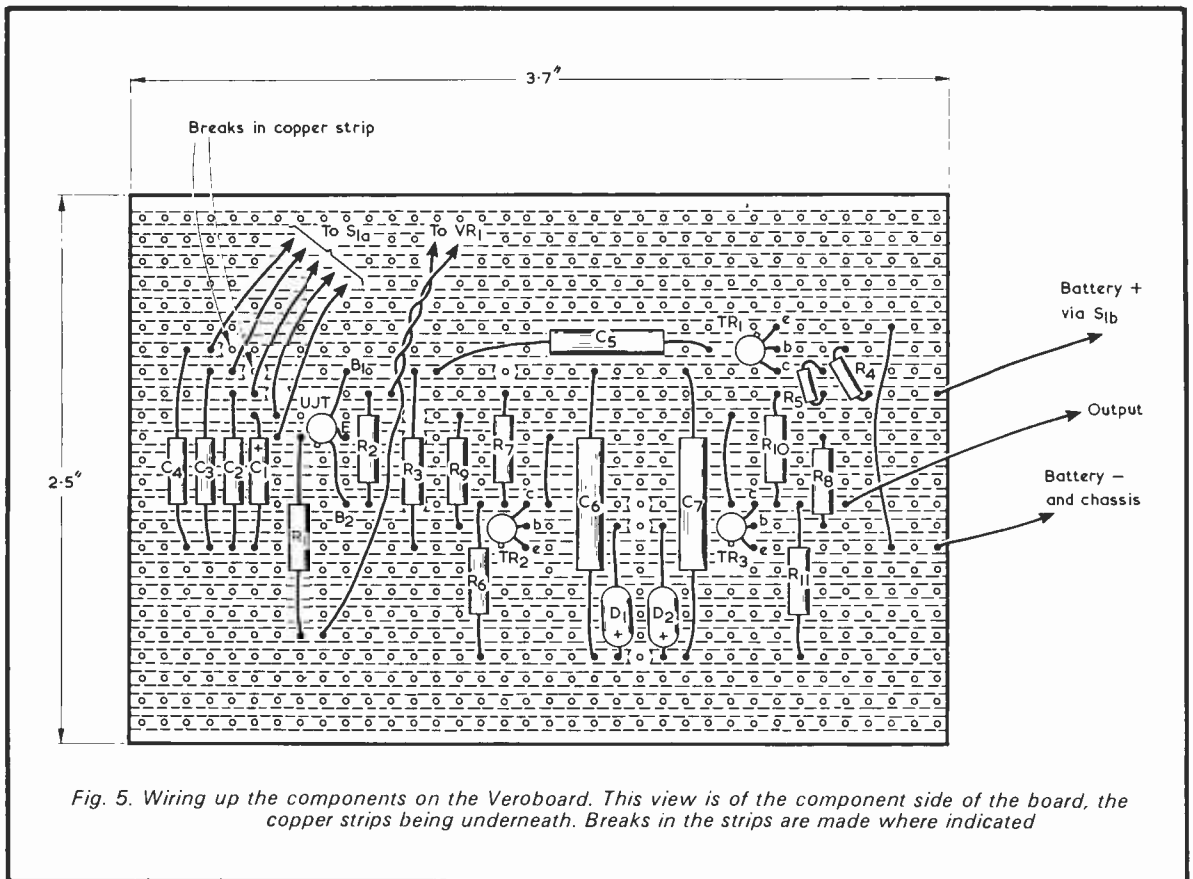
Wiring up the components on the Veroboard. This view is of the component side of the board, the copper strips being underneath. Breaks in the strips are made where indicated
